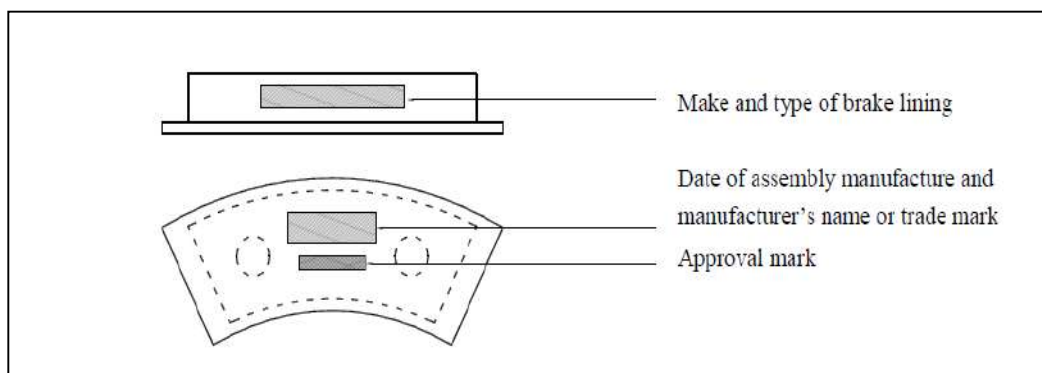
Example of pad assembly marking (Source: ECE Reg 90)
